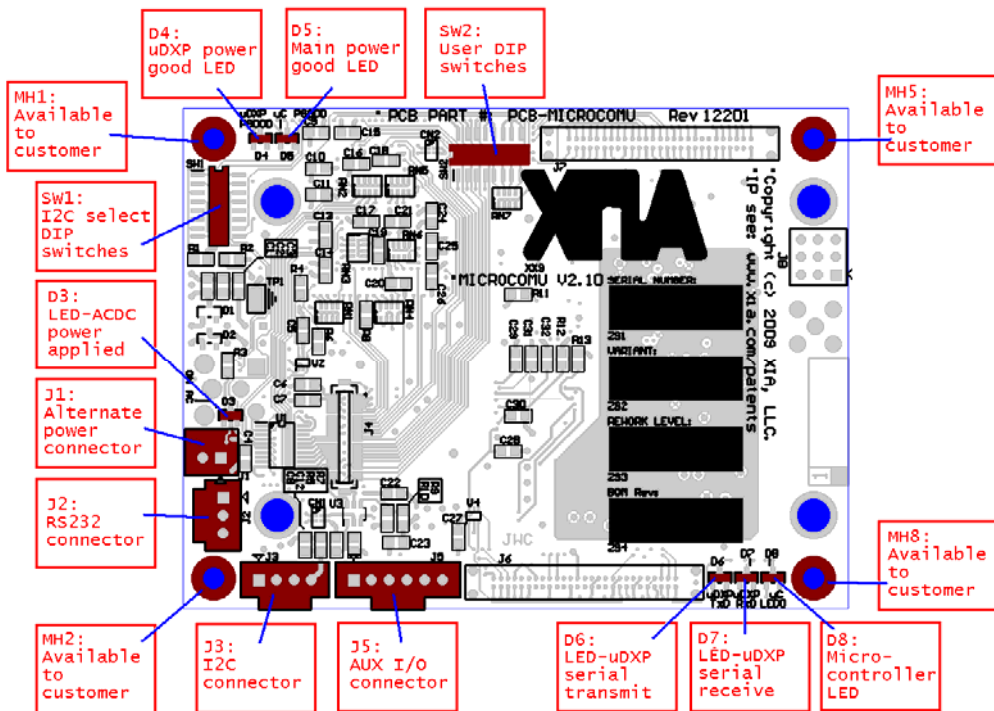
Locations of connectors, LEDs, and DIP switches on top side of board. Note that the MicroDXP is mounted to the top side of the board, using board-to-board connector J4.
